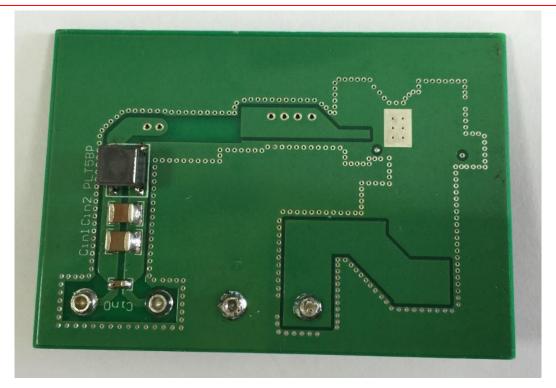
Reference Design Board Bottom View (61x42mm<sup>2</sup>)
